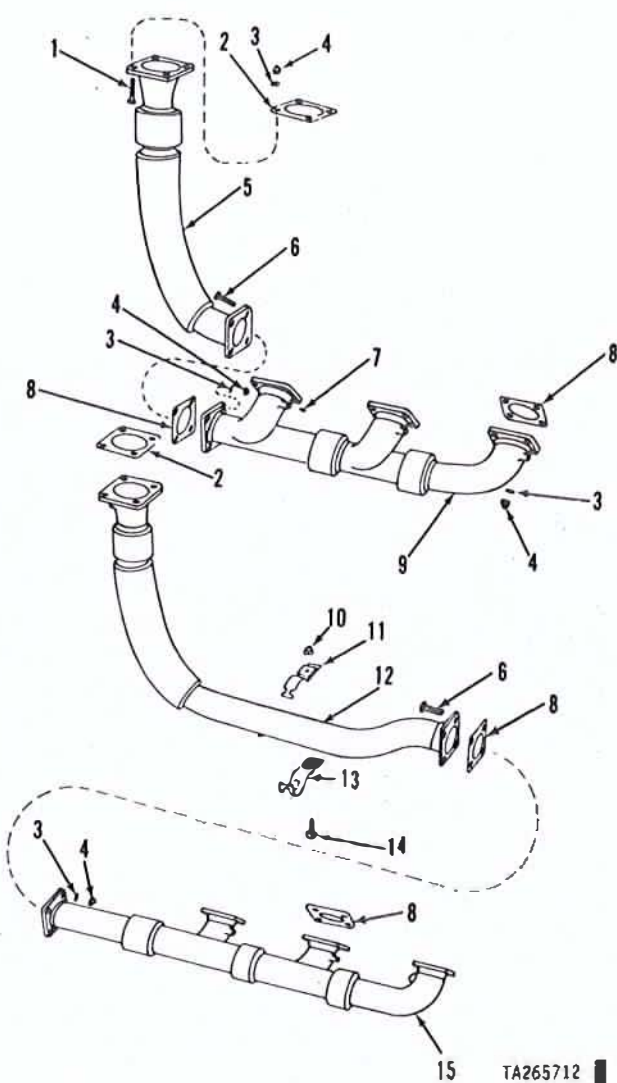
Exhaust manifold associated parts (right bank) - exploded view.
